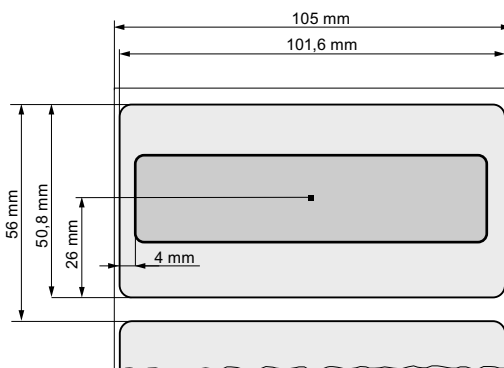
SIMATIC RF630L 6GT2810-2AB01 dimension drawing
